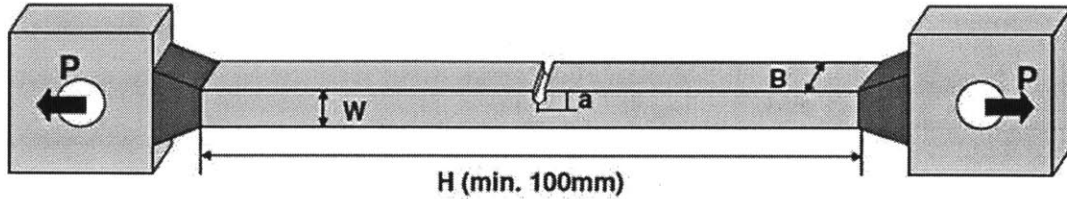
SENT specimen sketch with pin loading applied at the ends of the specimens.
